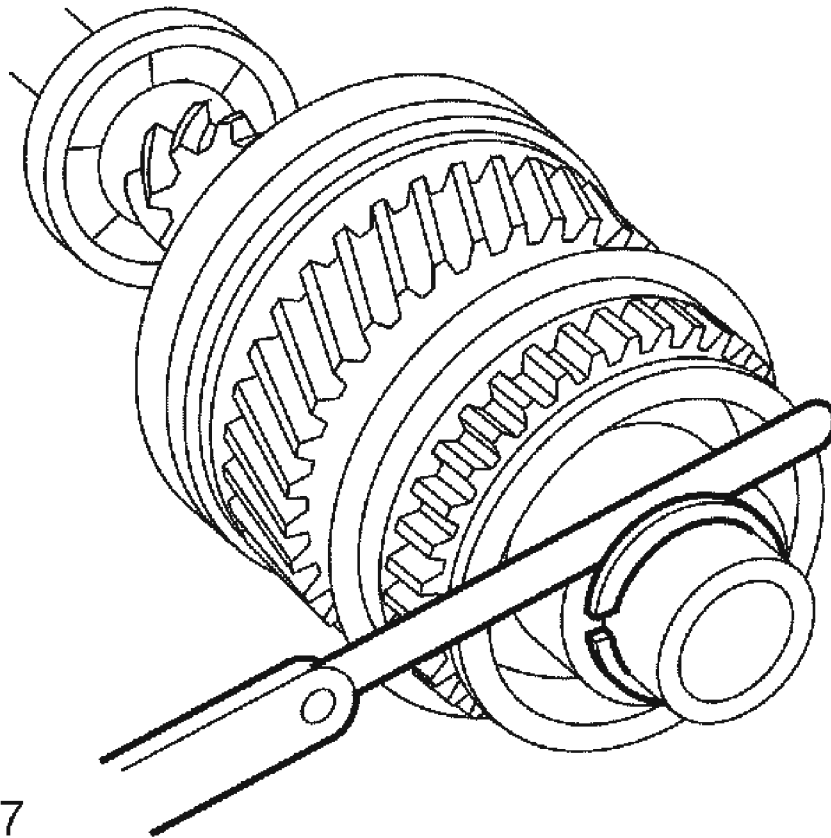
Installing 5th Gear Stopper And Input Shaft Bearing Spacer Together
